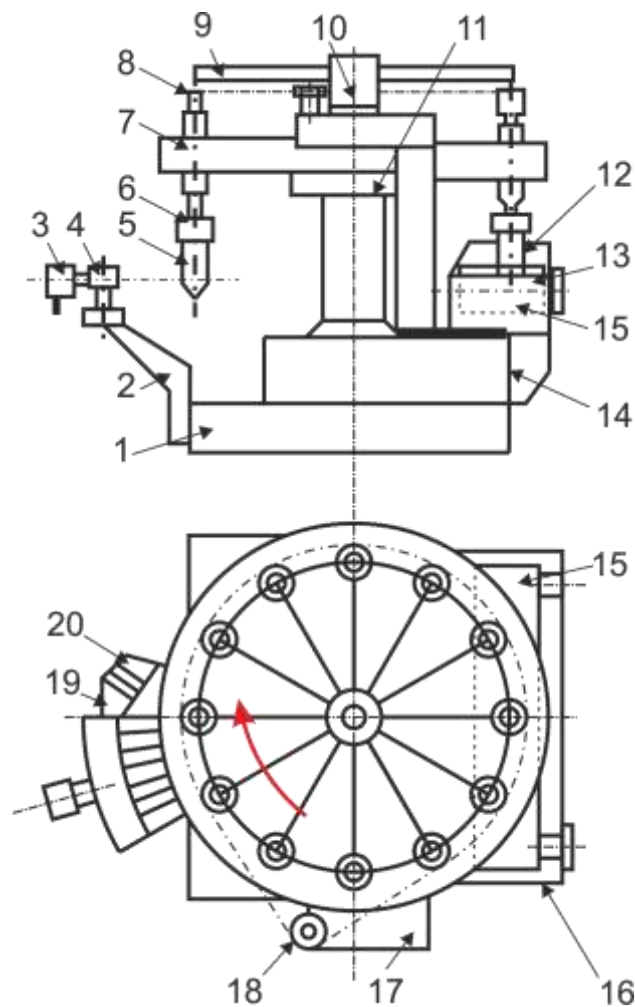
Cracking-off machine with belt grinder for grinding cracked-off surfaces: 1 - frame, 2 - arm, 3 - mixer, 4 - burner segment of multi-flame burner, 5 - glass semi-finished product with moil, 6 - clamping head, 7 - carousel, 8, 18 - sprocket, 9 - roller chain, 10 - distributor for media, 11 - column, 12 - cracked-off ground glass product, 13 - sanding belt, 14 - drive housing of the machine, 15 - belt grinder roll, 16 - protective water screen, 17 - chain drive, 18 - sprocket, 19 - device for making notches, 20 - carbide wheel
